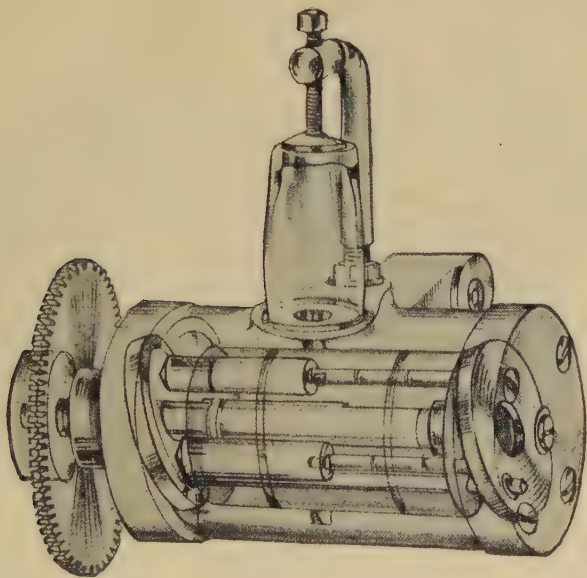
Borletti Spinning Pump, showing Pistons and Air Bottle.
